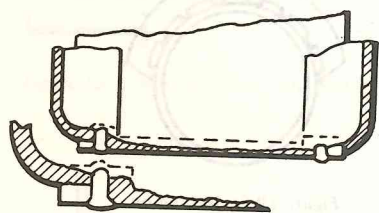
Wastage of combustion chamber bottom wrapper plate due to seam leakages
